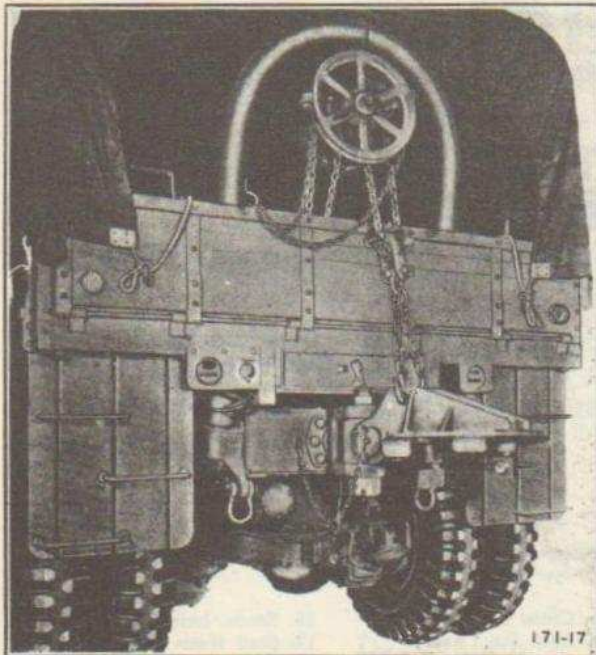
View Showing Chain Hoist Supporting Draw Bar
